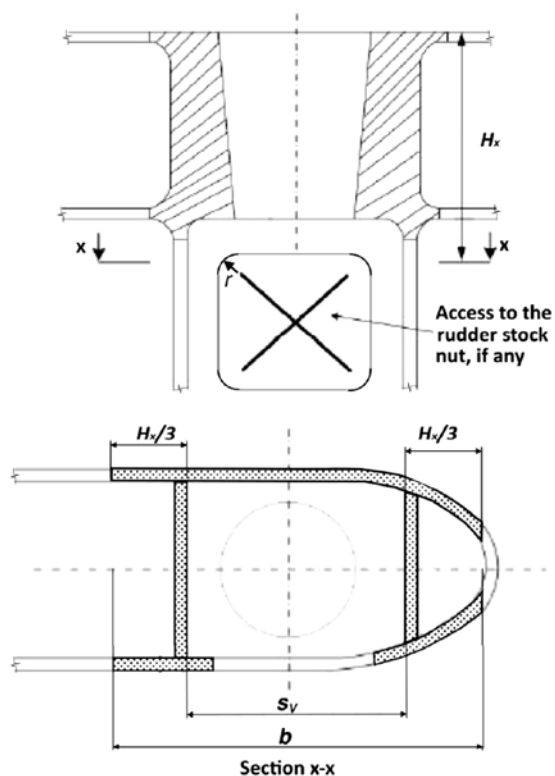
Cross-section of the connection between rudder blade structure and rudder stock housing, example with opening in only one side shown
